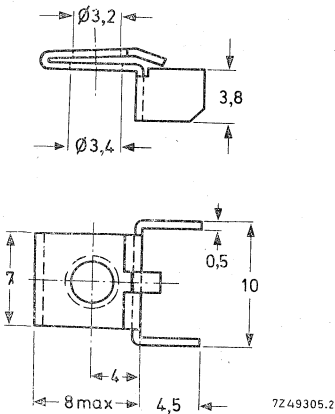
Cadmium plated steel mounting bracket 4332 026 06540.
